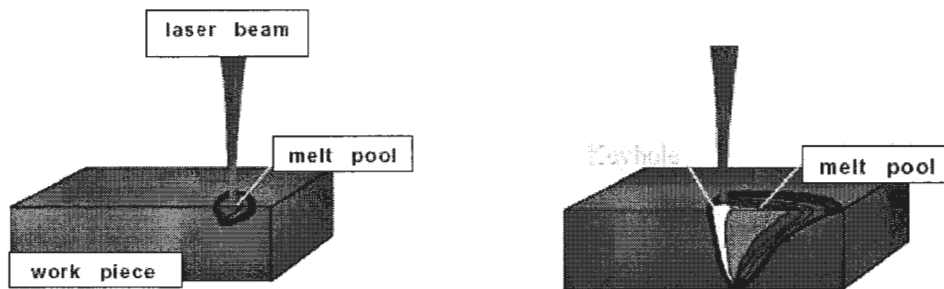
(a) conduction welding, (b) keyhole welding (source: Precitec Co.)
